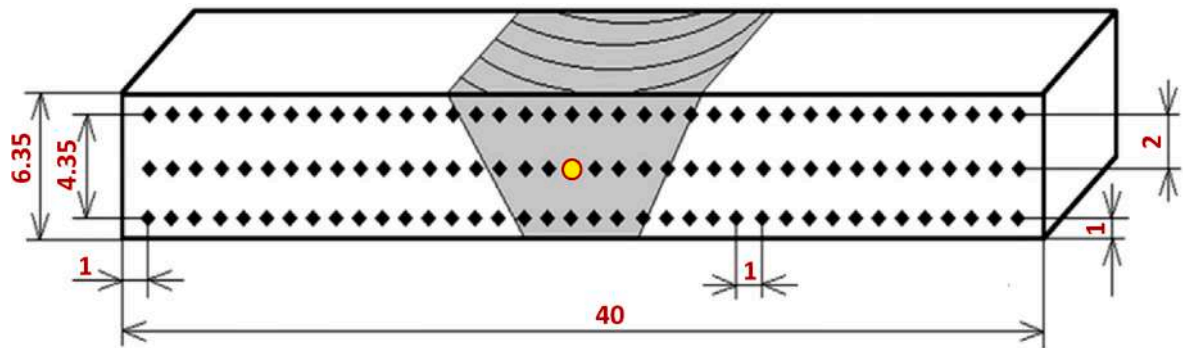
Cross-sectional macrograph of different welding zones in joints (dimensions in mm).
